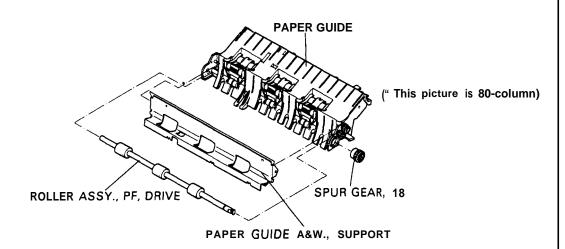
Removing the PAPER GUIDE ASSY., SUPPORT
